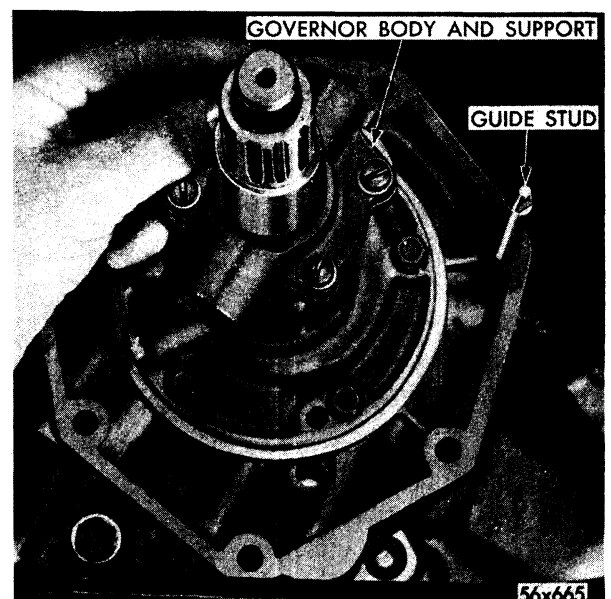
Removal and Installation of Governor Body and Support Assembly
